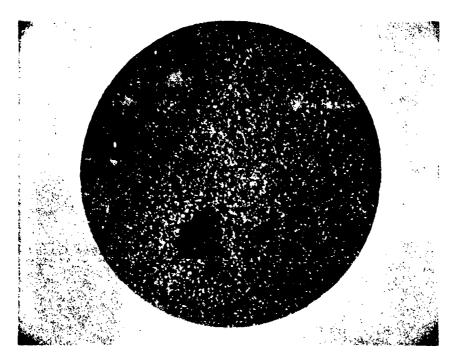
Fracture surface of the specimen No. 4 machined from the weld joint and pulled to failure. The specimen failed in the weld zone. The initiation zone of the fracture was a flat spot surrounded by fibrous fracture. The rest of the specimen showed smooth surface.
